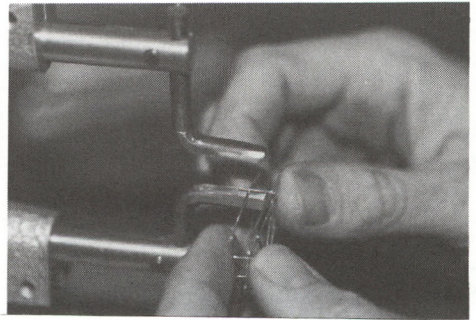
A small length of wire should extend beyond the weld site.
